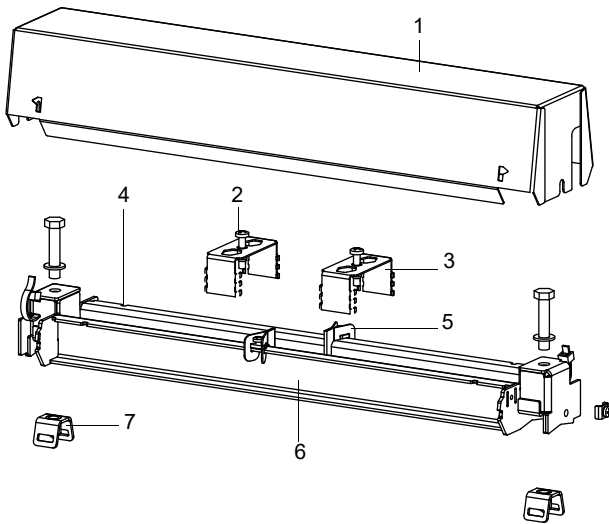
Disassembly of the transducer mounting fixture Variofix C
